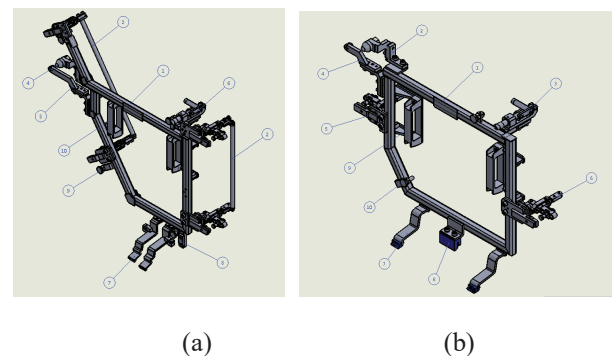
Existing rear door car fitting jig (a) and re-design rear door car fitting jig (b) main assembly.
